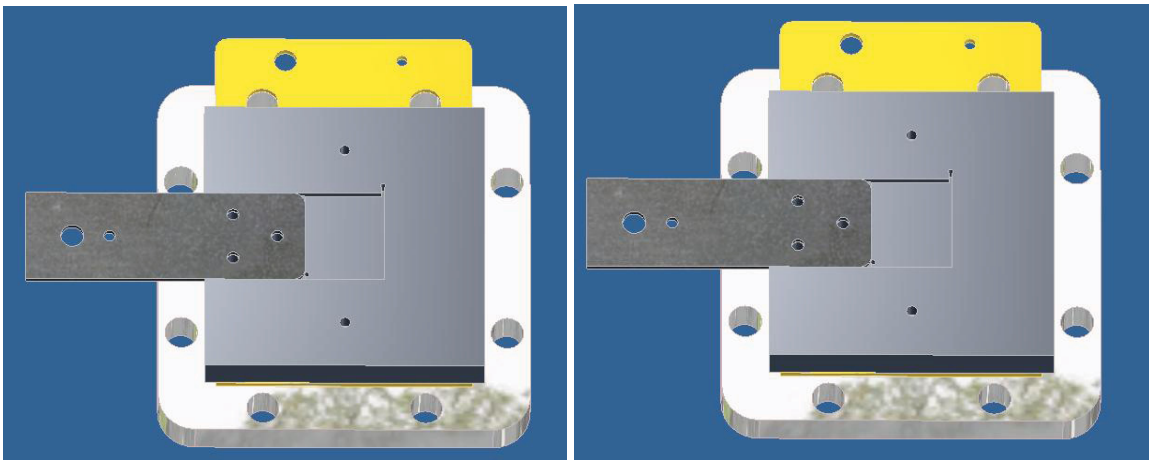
Fixture which has been modified for Ribbon Cell testing.
